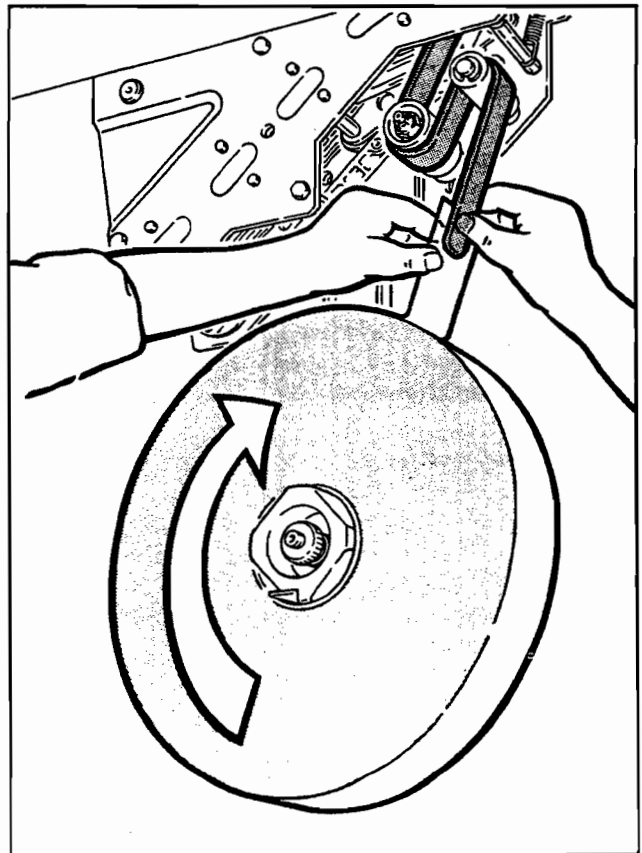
800a/800a3/800ab - Lower Taping Head
